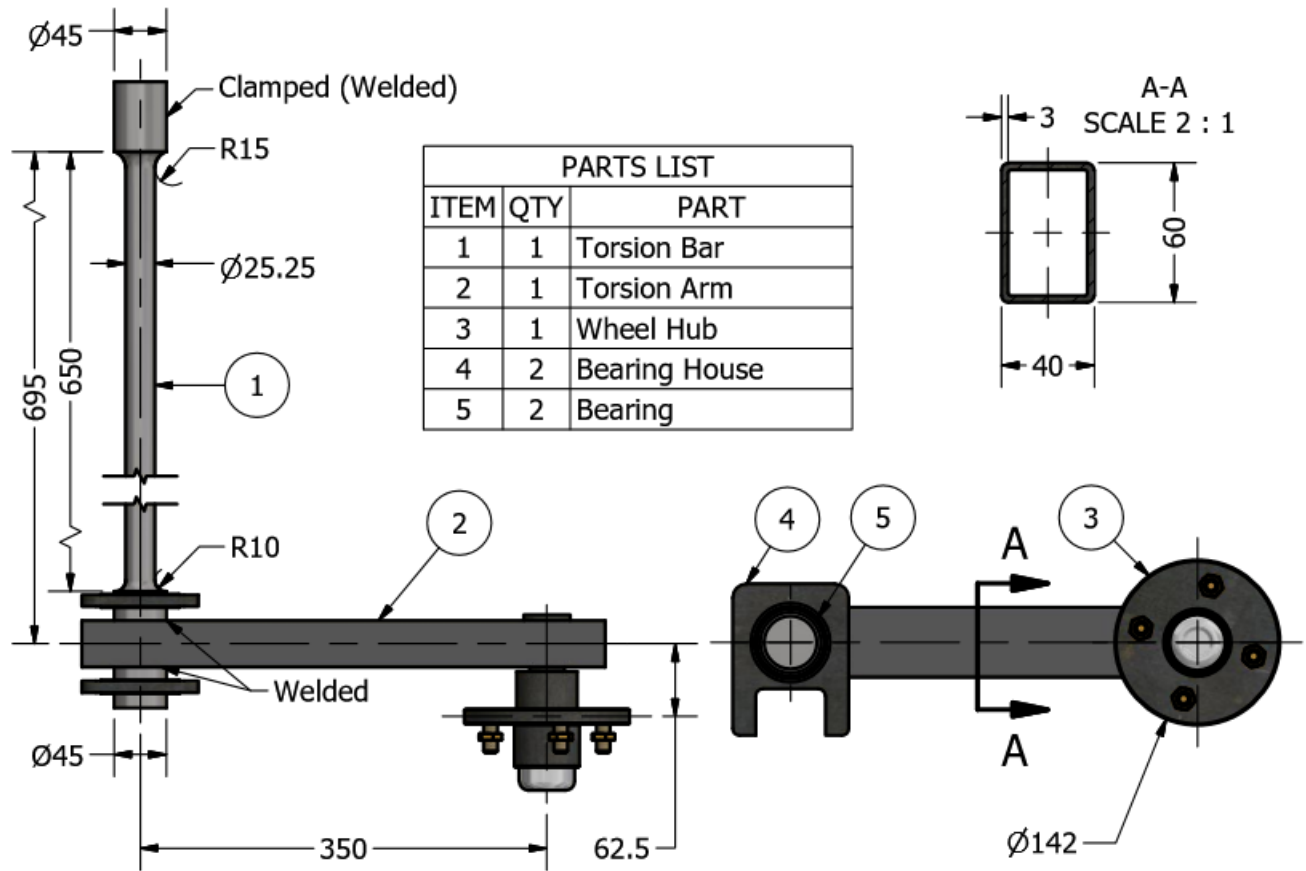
Technical Drawing of the Suspension System, Built Rig
